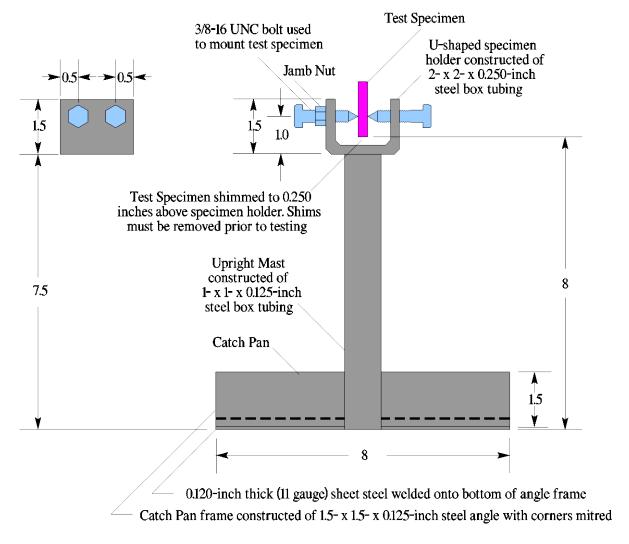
Magnesium Alloy Test Specimen Mounting Stand and Holder (side)
